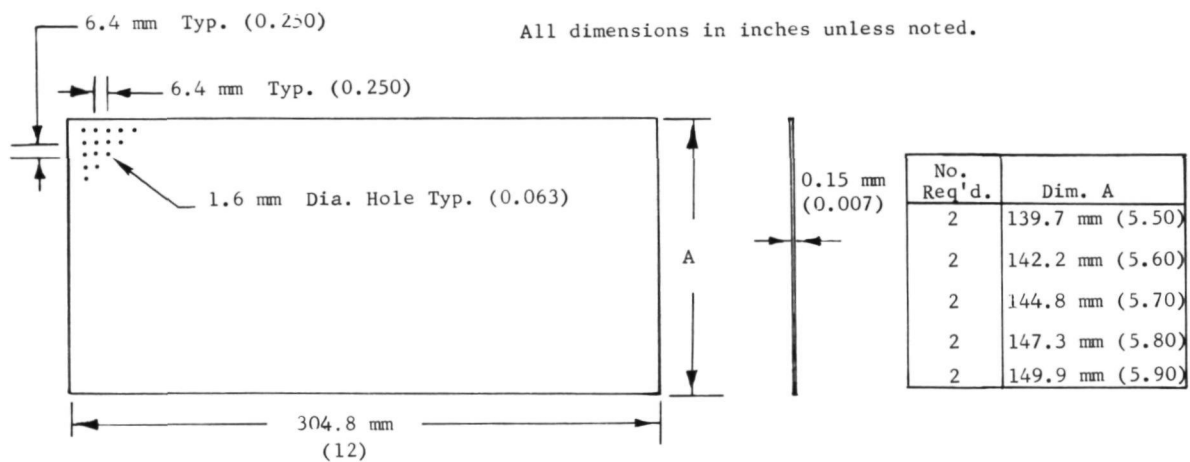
DESIGN DRAWING OF THE TITANIUM SHIMS.
